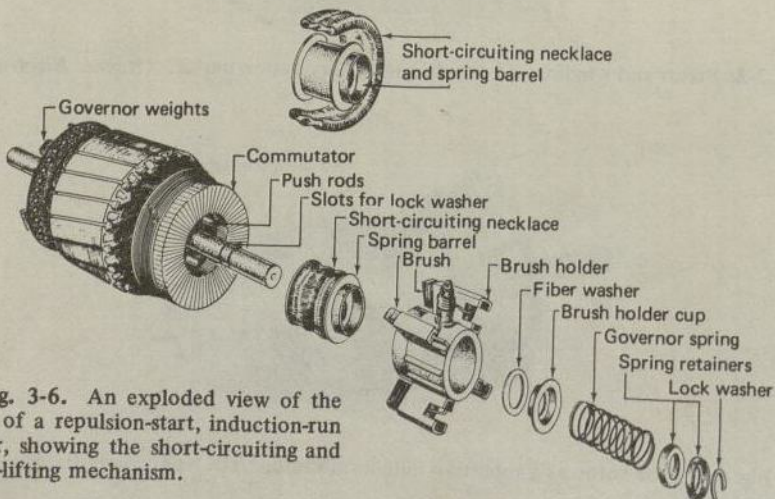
An exploded view of the rotor of a repulsion-start, induction-run motor, showing the short-circuiting and brush-lifting mechanism.
